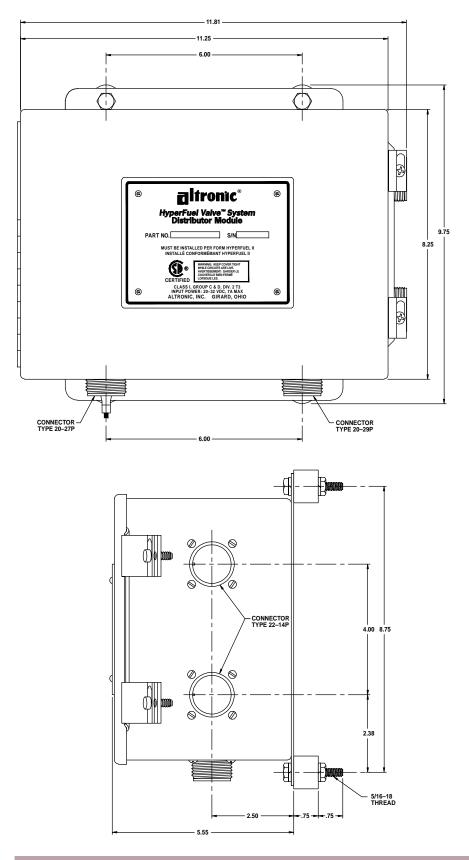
DISTRIBUTOR MODULE MOUNTING DIMENSIONS
